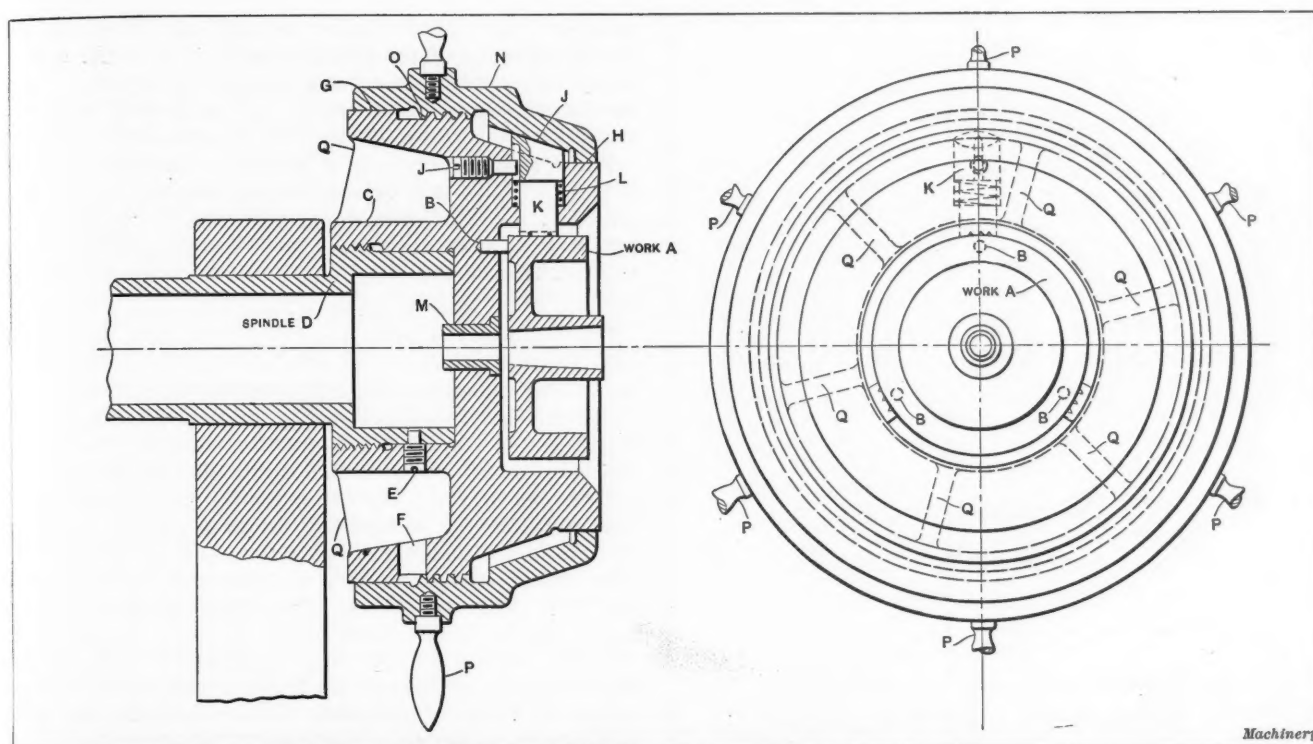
Special Type of Chuck with Clamping Pins for a Small Flywheel Casting
